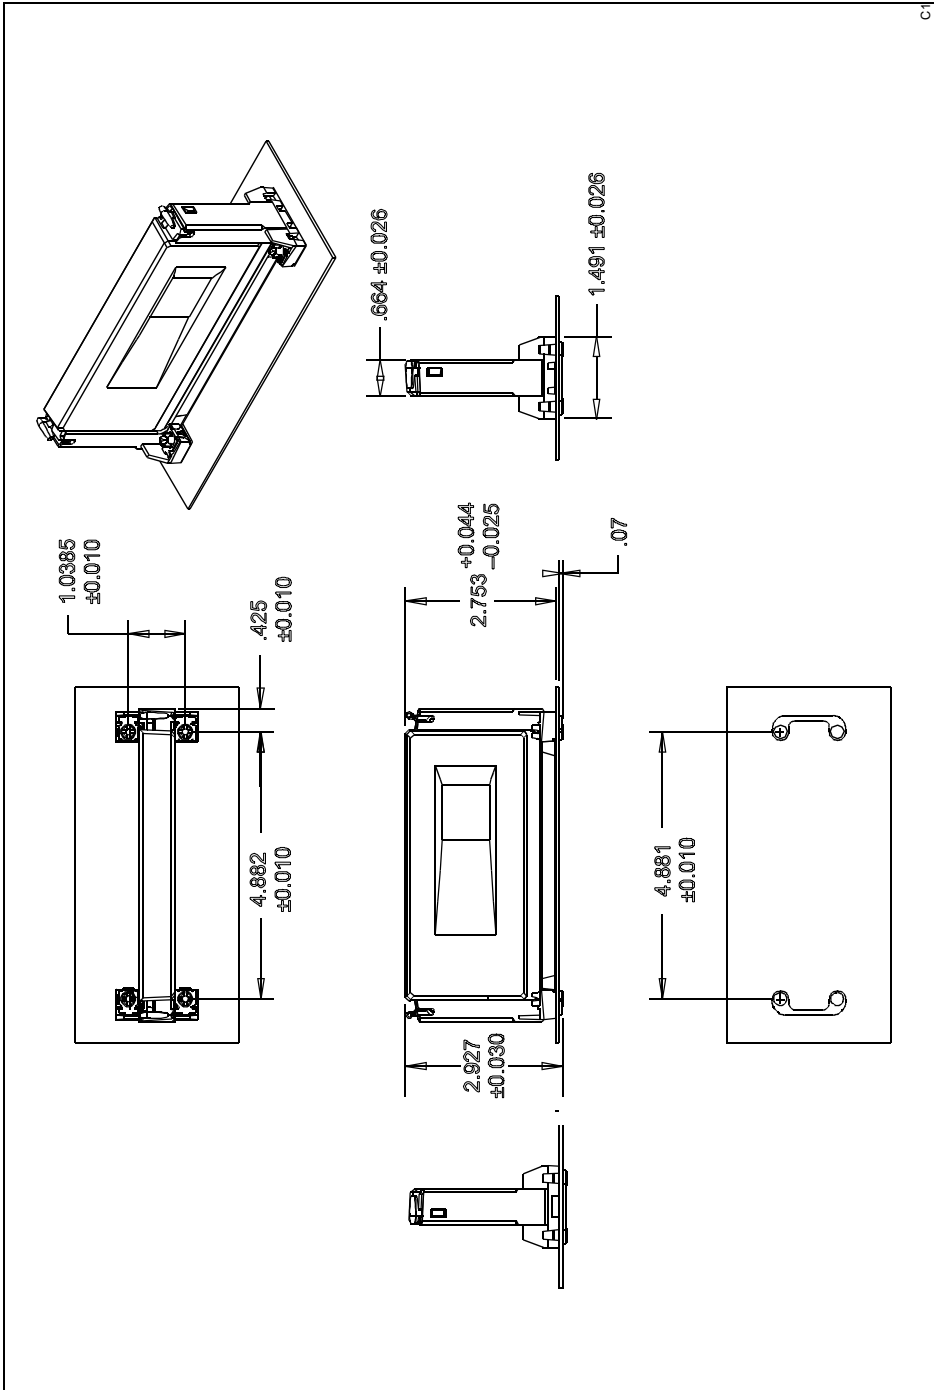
S.E.C. Cartridge, Retention Mechanism and Attach Mount Assembly
